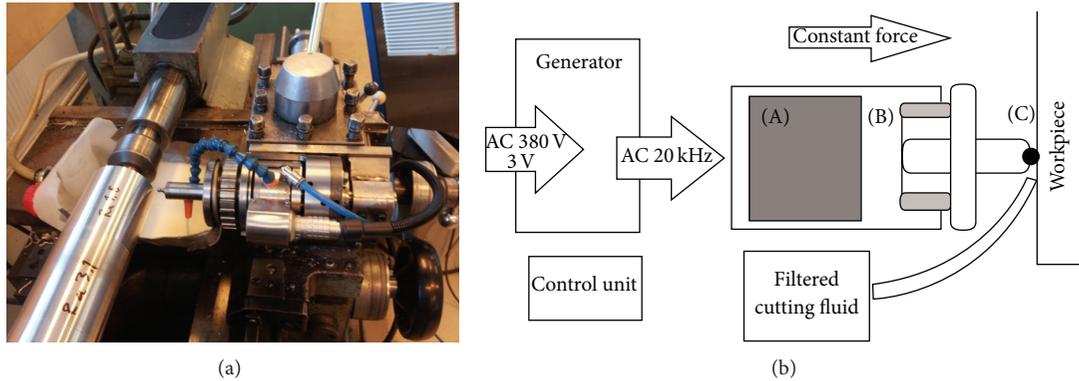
The ultrasonic burnishing equipment installed on a manual lathe (a). Ultrasonic burnishing system (b) [1].
